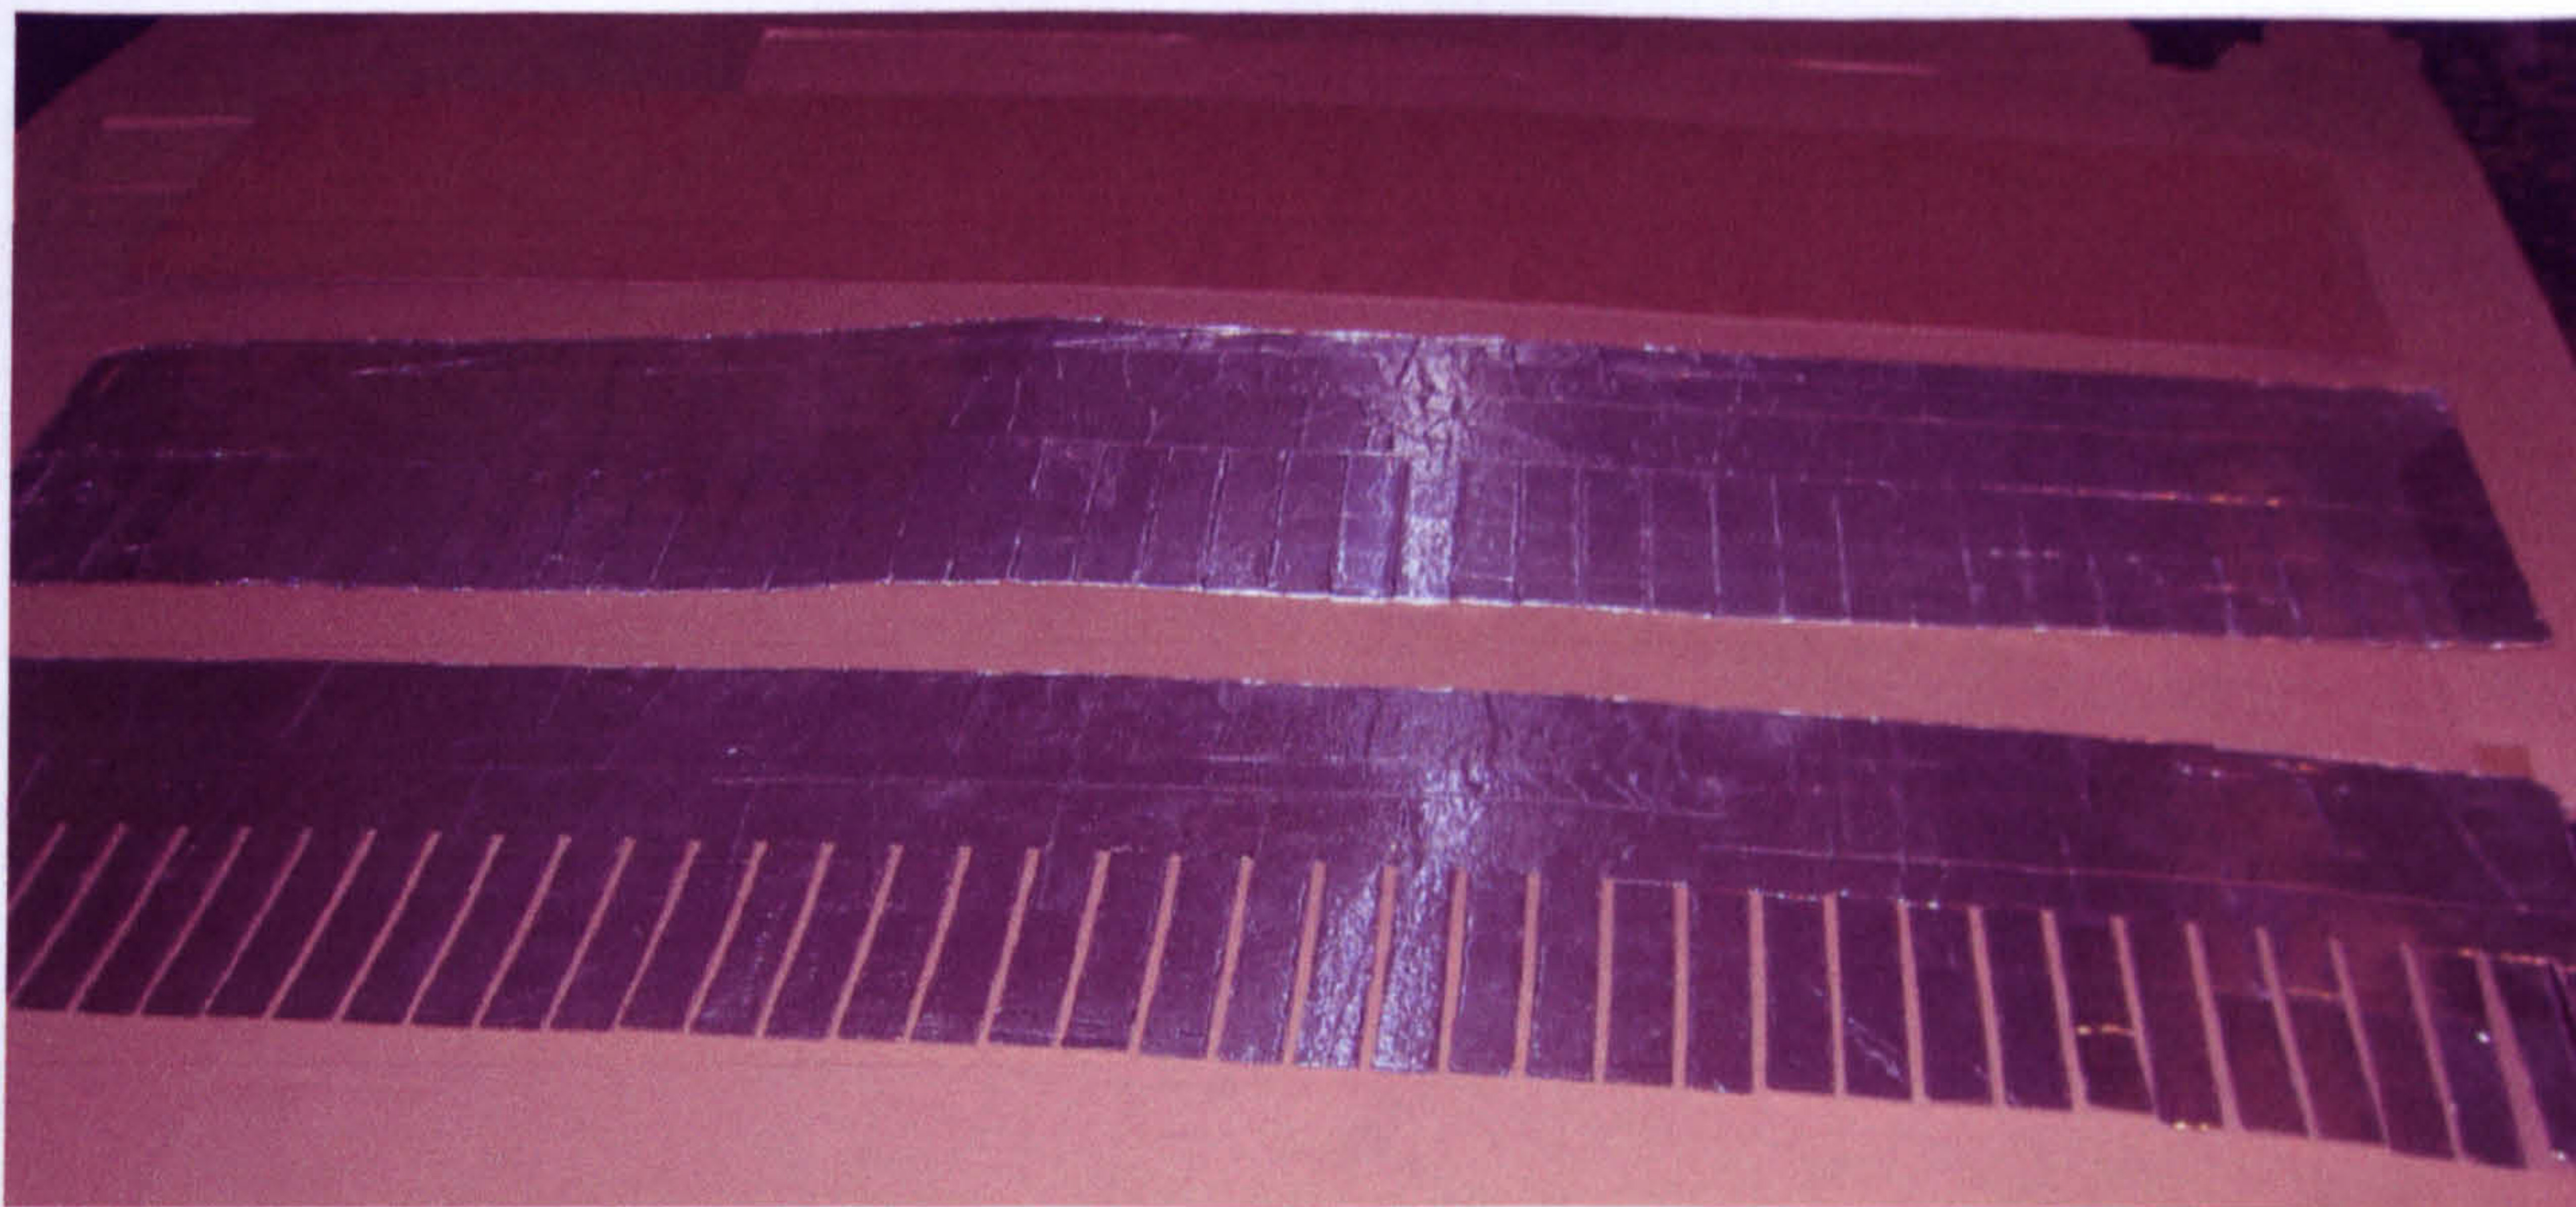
Showing uncoated cardboard, coated cardboard, cut to correct size honeycomb slat sheet.
